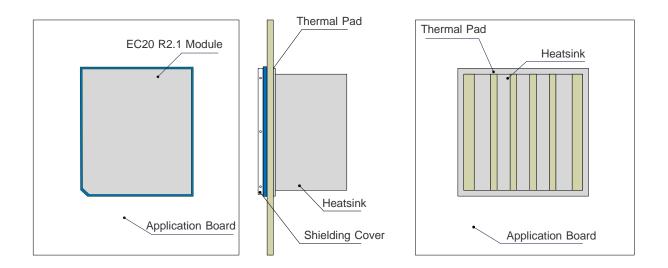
Referenced Heatsink Design (Heatsink at the Backside of Customers' PCB)
